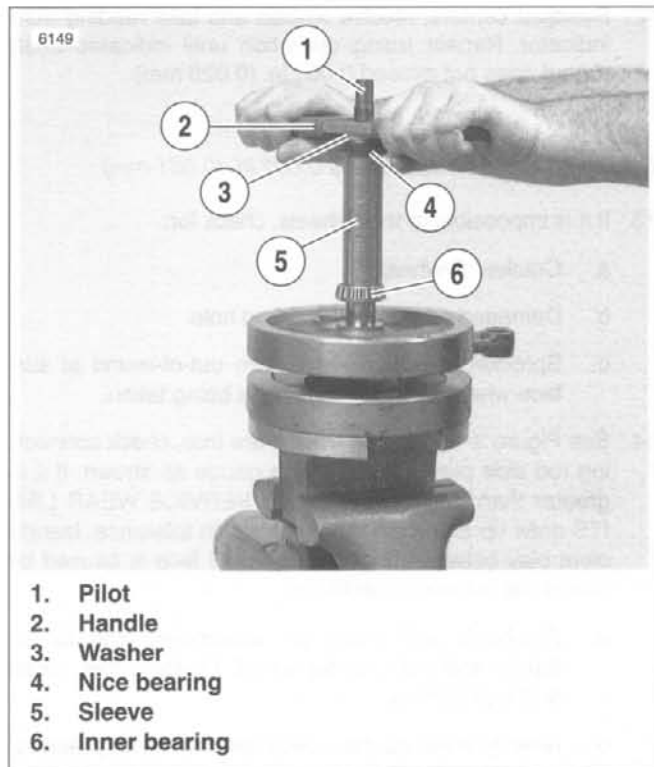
Installing Sprocket Shaft Bear Outer Races
